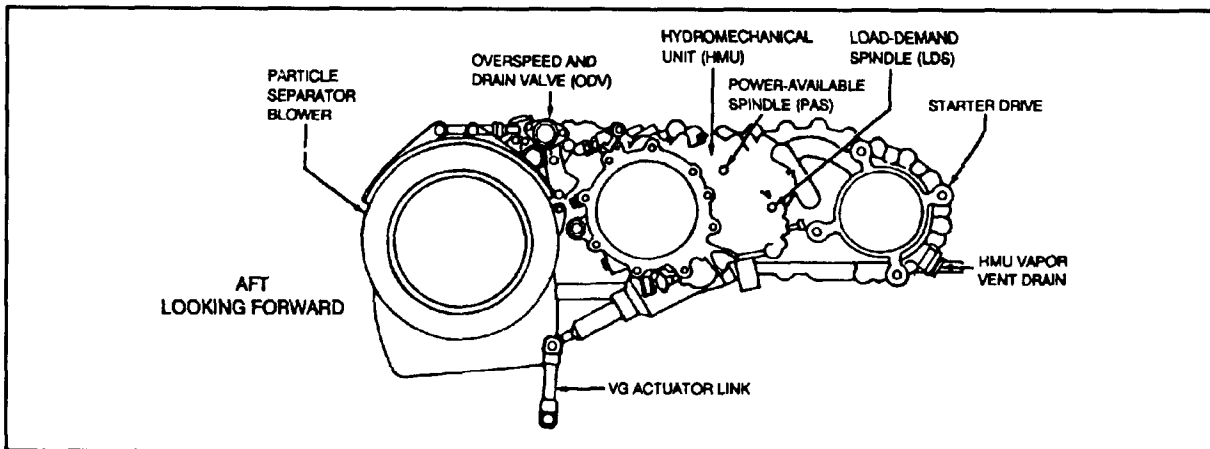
(T-701) Component Locations on Accessory Section Module
